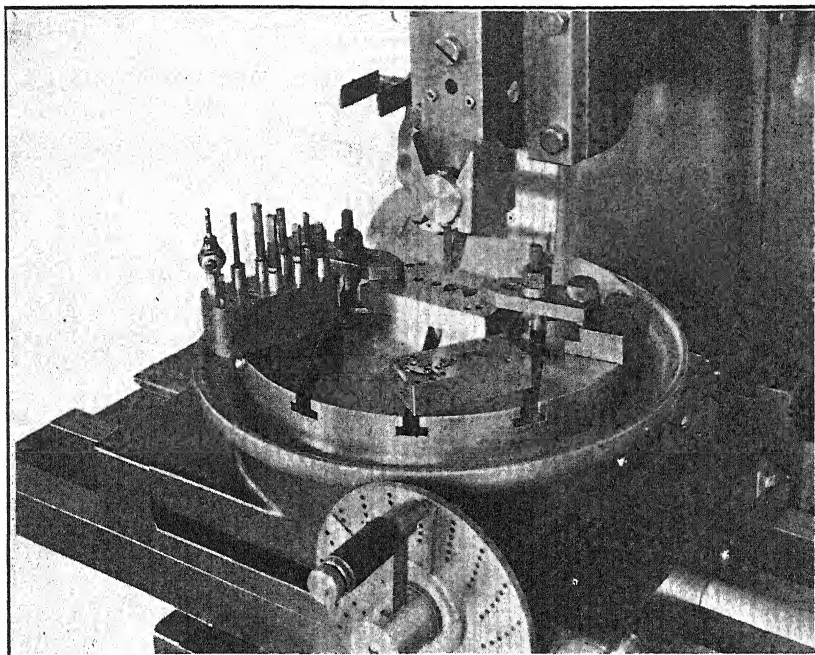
A Silent-Chain-Link Die Being Machined on the Tilted, Rotary Table of the Hanson-Whitney Die-Shaping Machine.
